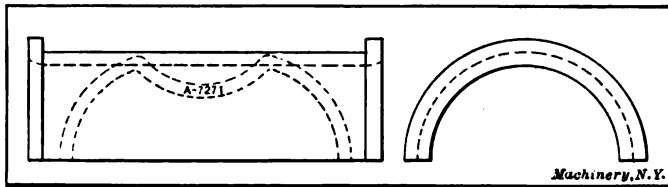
Die-cast Half-round Bearing, Showing the Cast Oil Grooves
